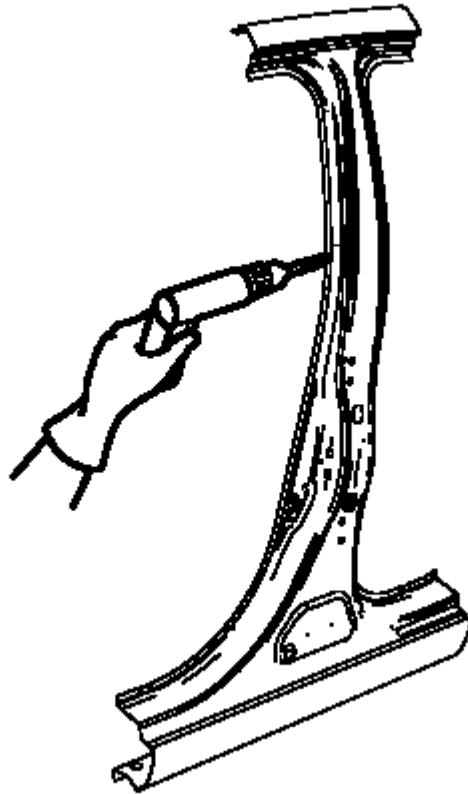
Drilling 8 Mm (5/16 In) For Plug Welding Along Edges Of Body Lock Pillar Outer Panel
